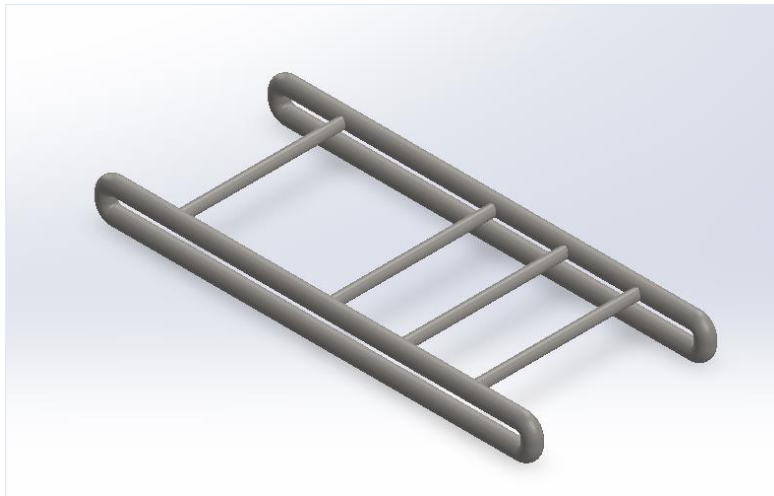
3D CAD model of Circular Cross Section Chassis
